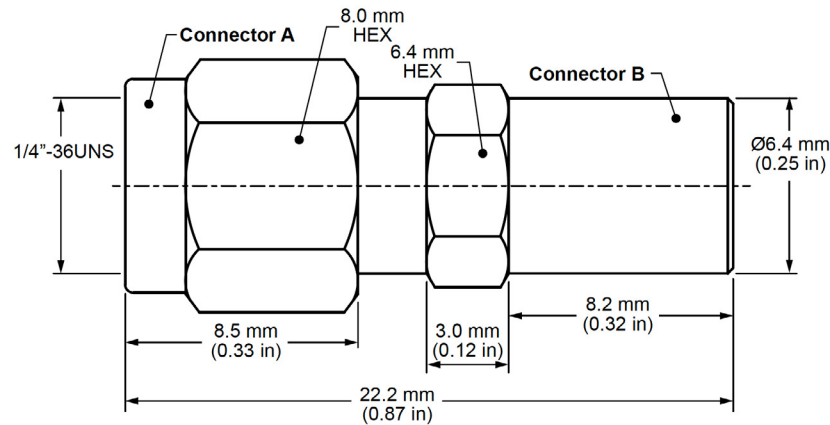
Product Dimensions for the ADP-SMAM-SMBM-G Adapter
